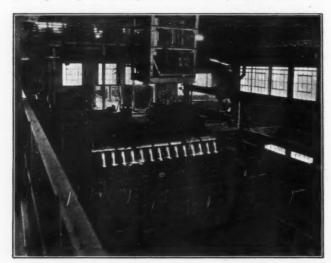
Multiple-Lipped Ladle for Pouring Metal in Horizontal Pipe Molds, and Cranes for Handling Flasks After They Are Shaken Out
